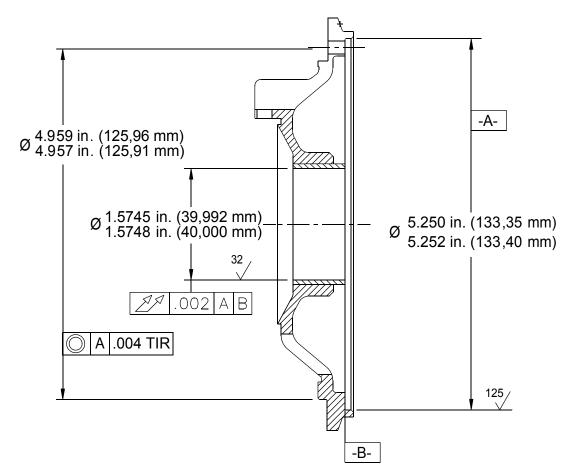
Drive End End Bell Bearing Liner Machining Specifications (IPL 10003, P/N 23081-1490)
